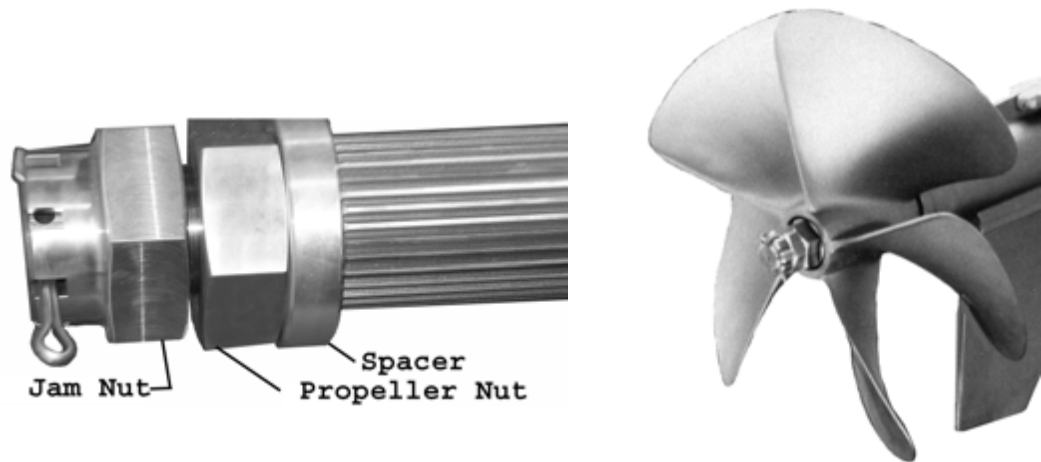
Propeller Retaining Parts (left), and Propeller Installed (right)
